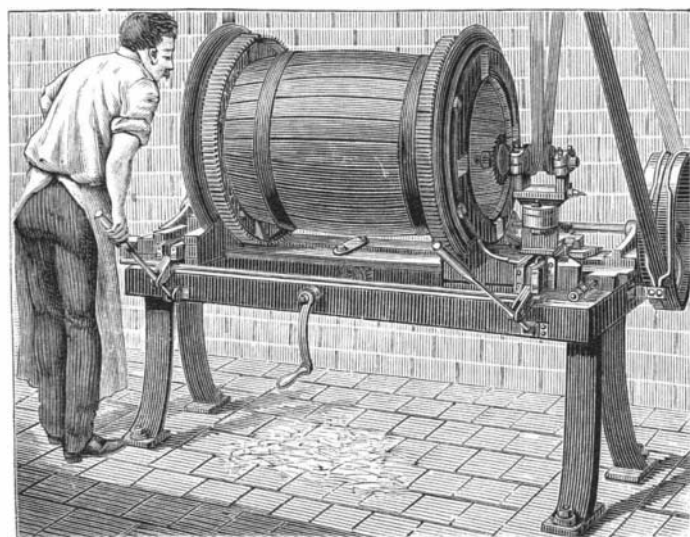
CROZING AND CHAMFERING MACHINE.
